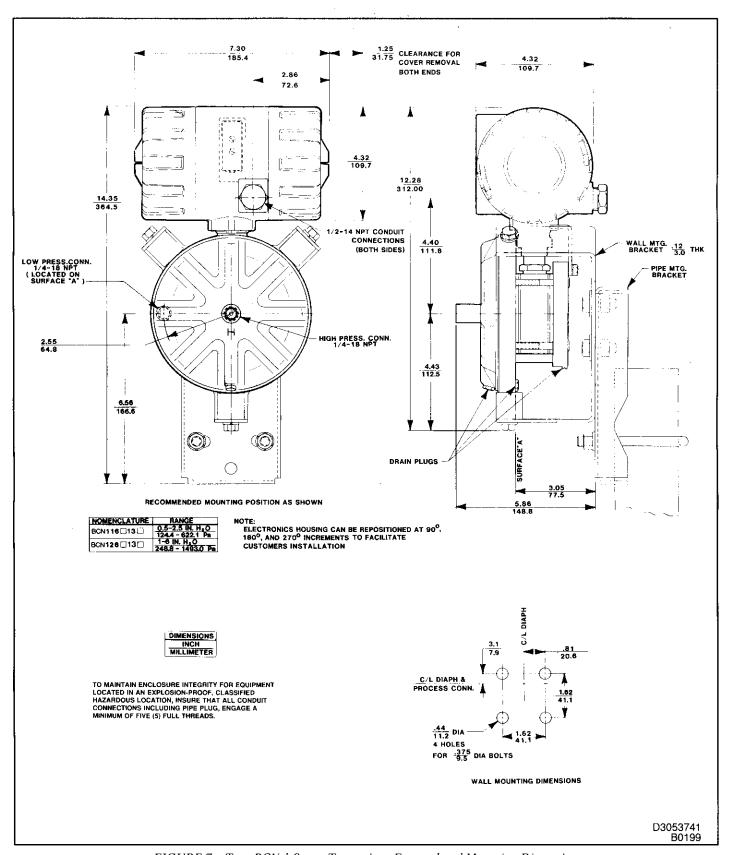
Type BCN 1 Smart Transmitter External and Mounting Dimensions
